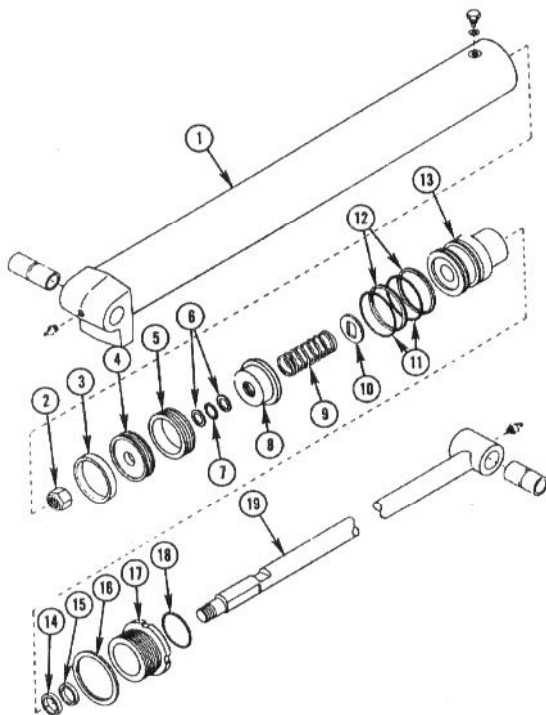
Identification of Parts Typical of MF Part Nos. 707 413 M91, 1605 161 M91 and 1605 162 M91
